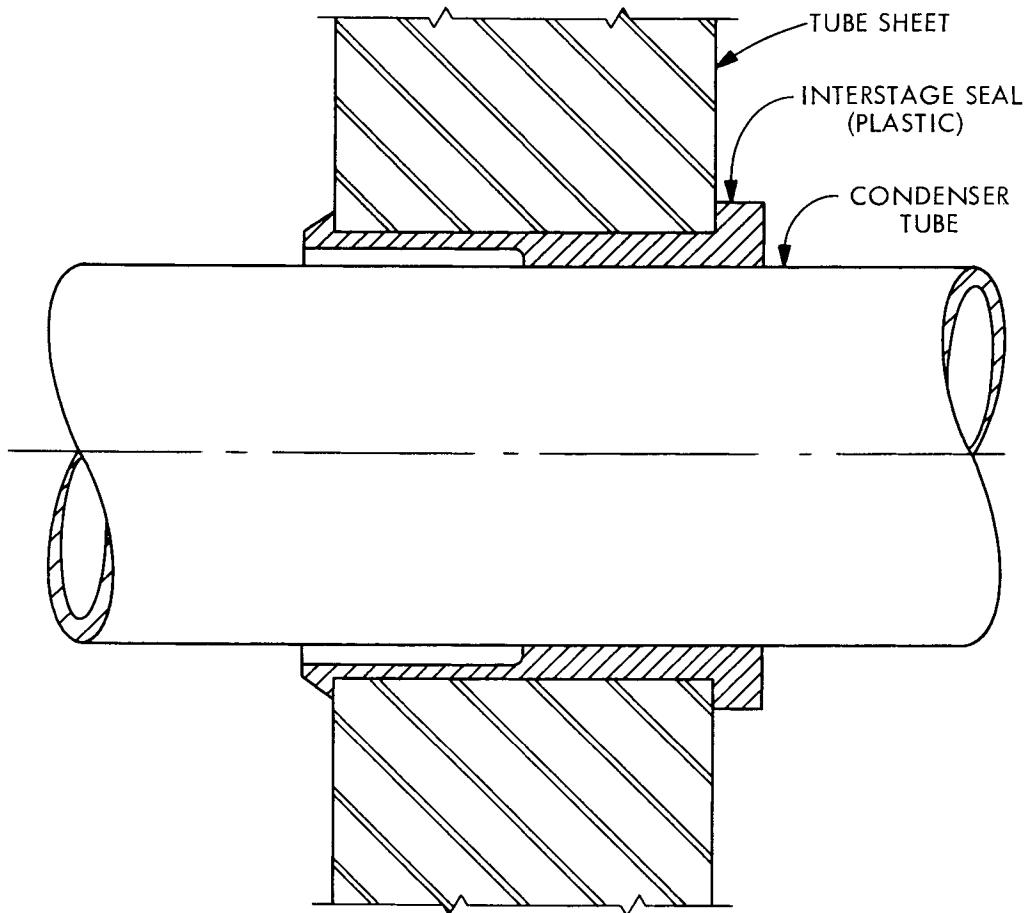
Seal Design 1. Tube diameter, 0.750 in.; hole diameter, 0.875 in.
